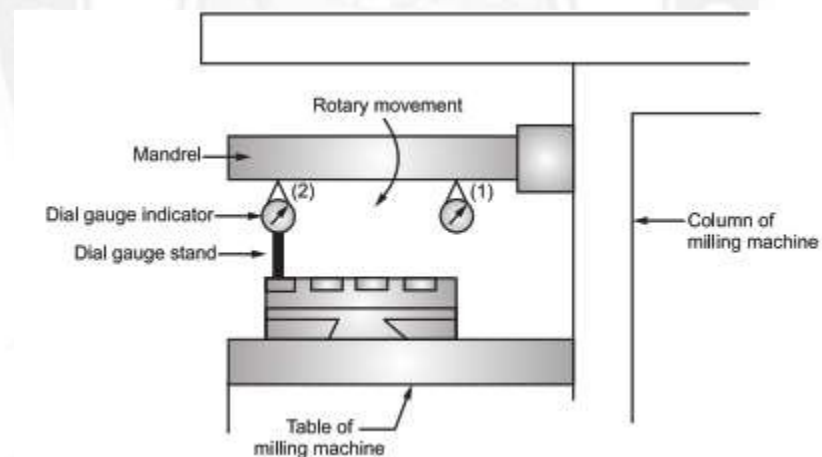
Transverse Movement Parallelism with Spindle Axis
